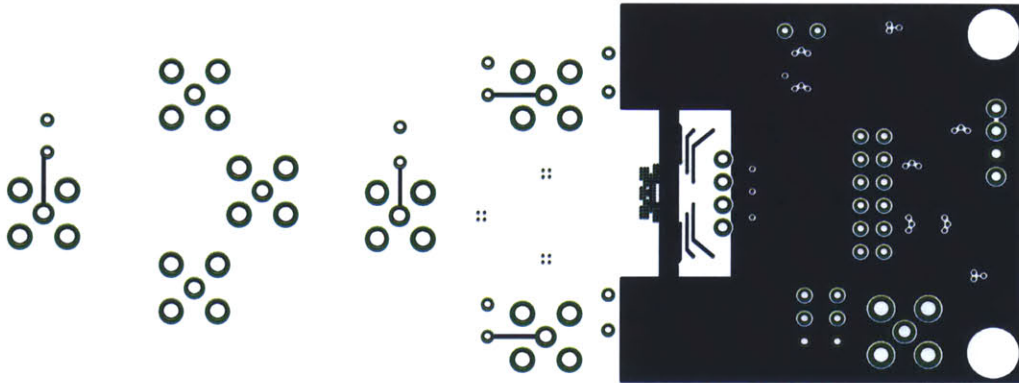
The Layer 2 PCB Layout of the Ac Power Delivery Delta System IC PCB Prototype.
